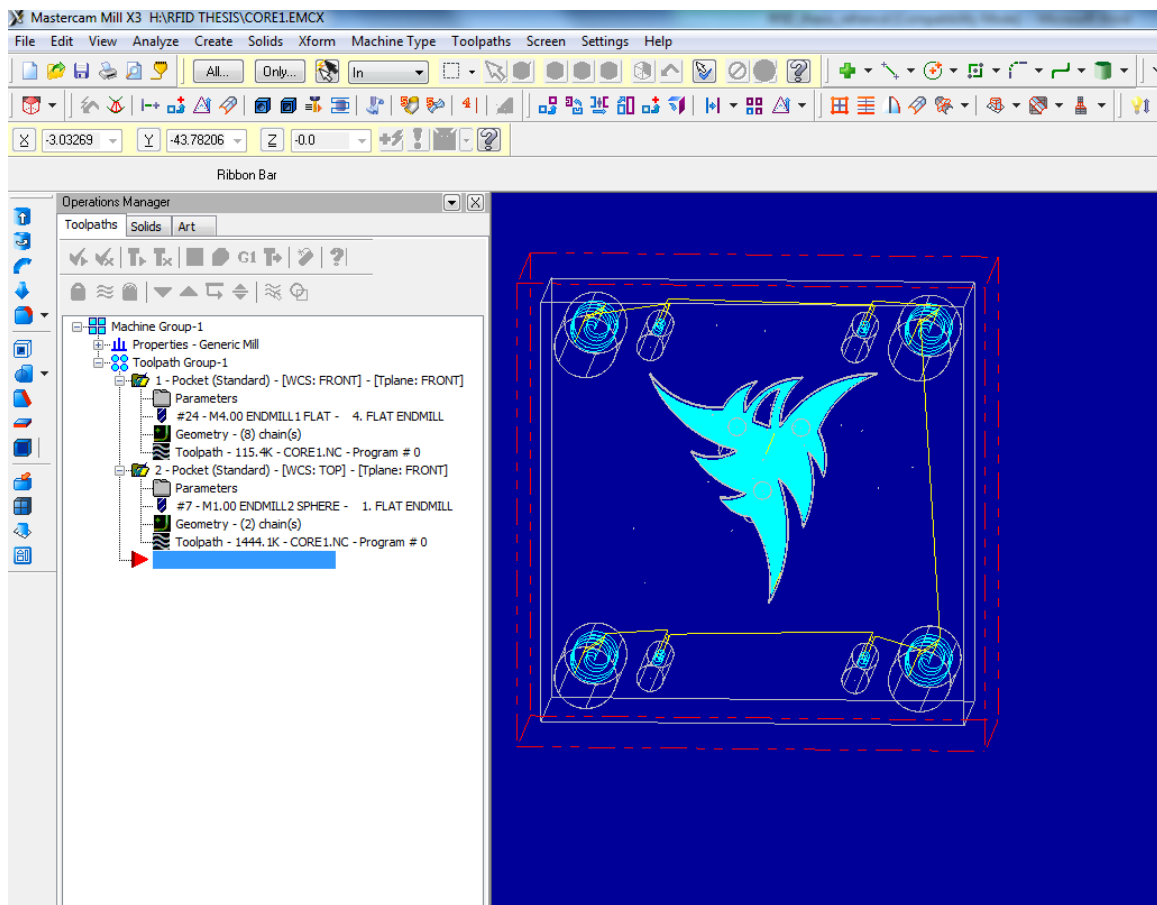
MasterCAM tool path of Arc-Key [Drawn by Author in MasterCAM]
